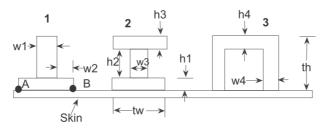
Different cross sections of the stiffeners considered for the study (1. T-section 2. I-section, and 3. Hat section.)
